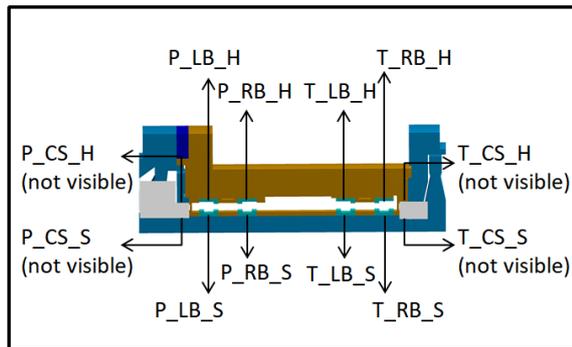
Component nomenclature: P and T refer to Pump side or Turbine side, R and L refers to Right or Left, B refers to bearing, CS refers to seals and S and H refers to whether the bearing or seal is in contact with shaft or housing
